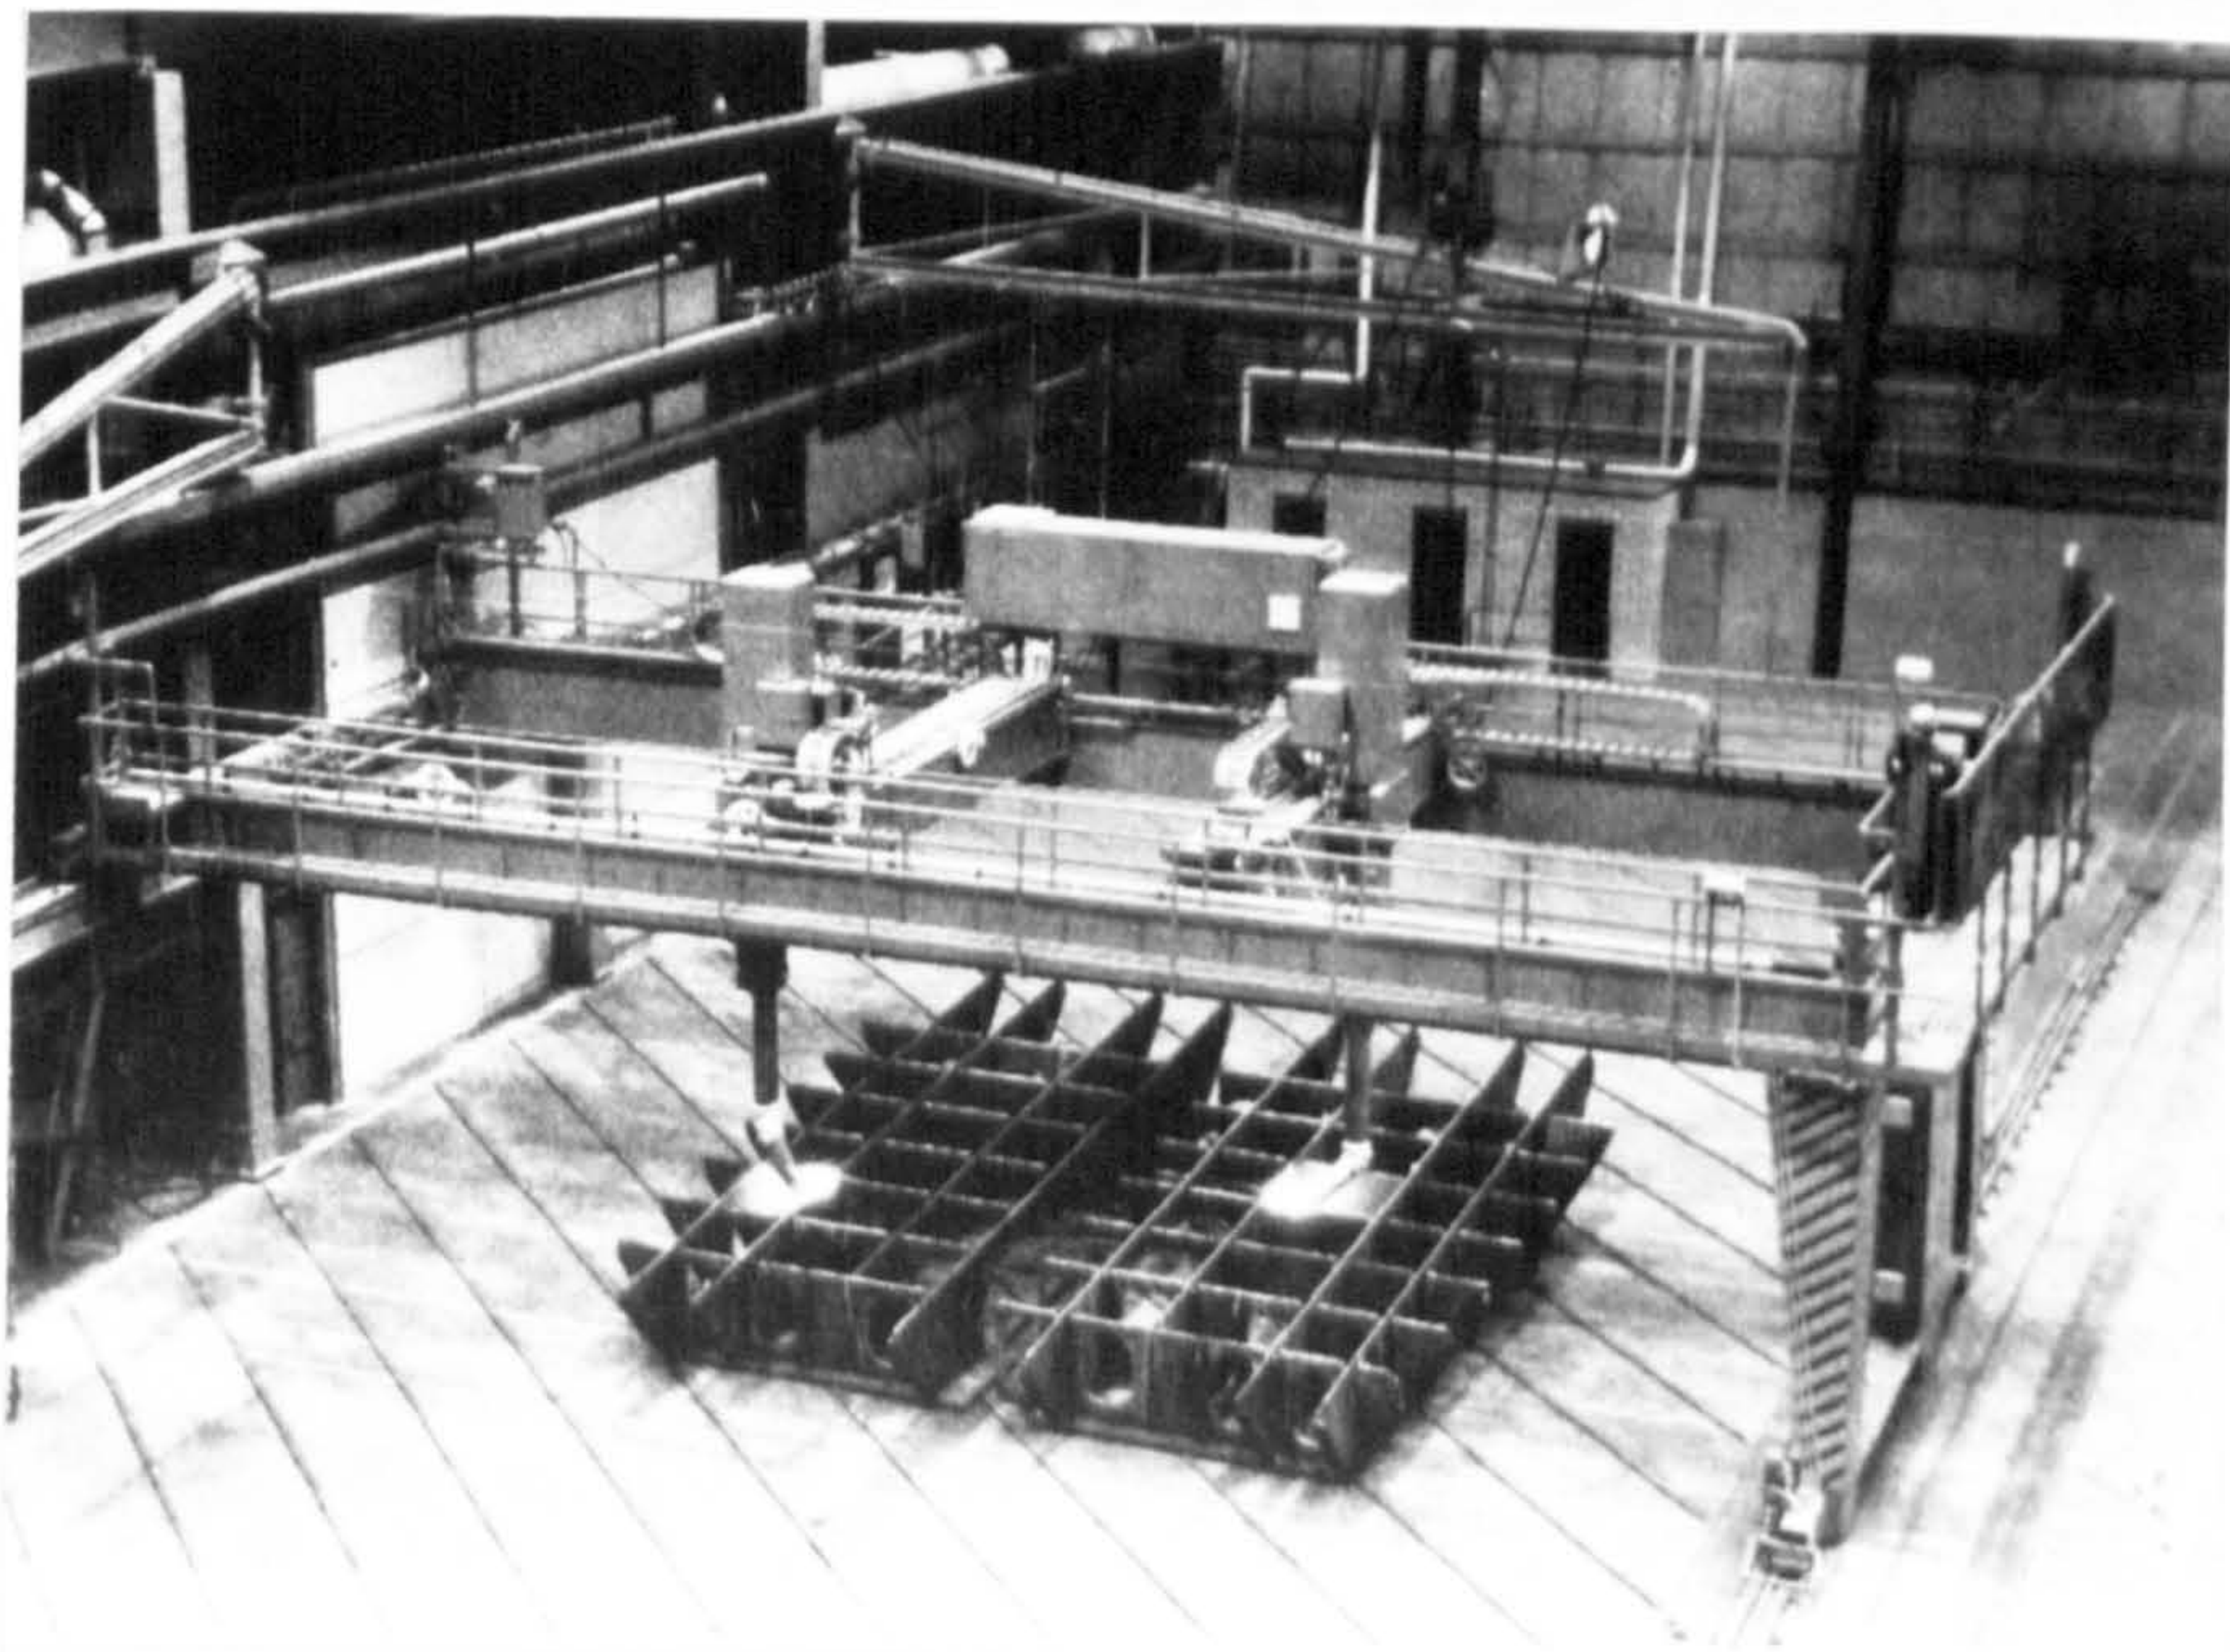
Gantry based production welding robot using MIG welding
